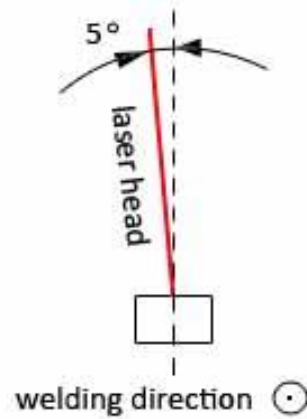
Inclination angle of the optical head relative to the vertical axis used for laser welding of aluminium and stainless steel.
